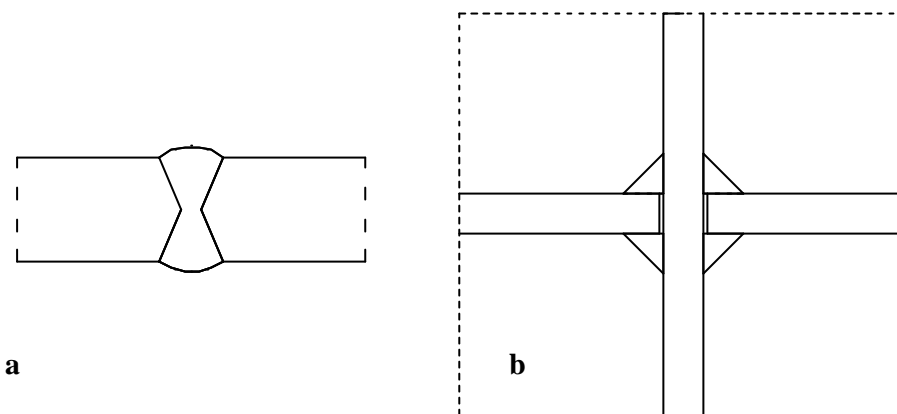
(a) butt weld, (b) cruciform fillet weld
